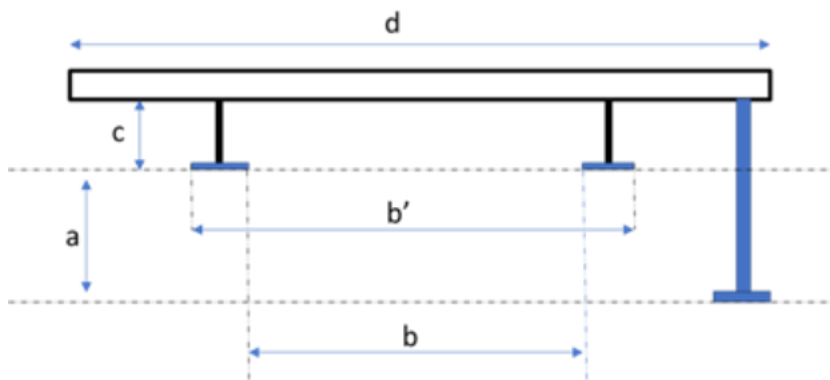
Mechanical fixation/mounting (one concept for different dimensions of frame)
